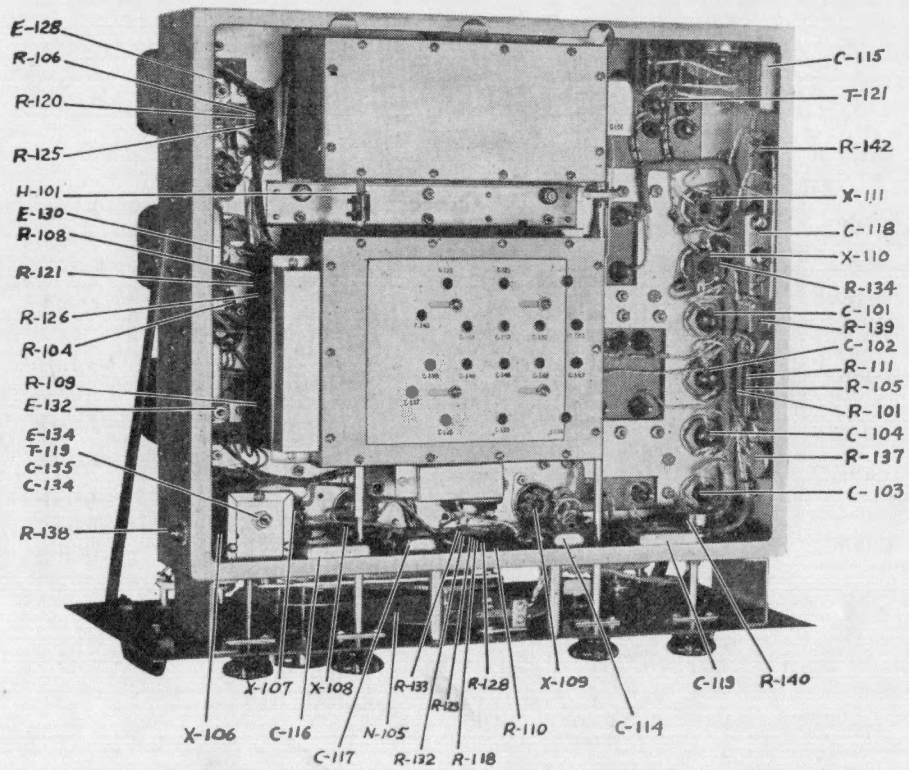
RIGHT BOTTOM OBLIQUE VIEW, RADIO RECEIVER CHASSIS
